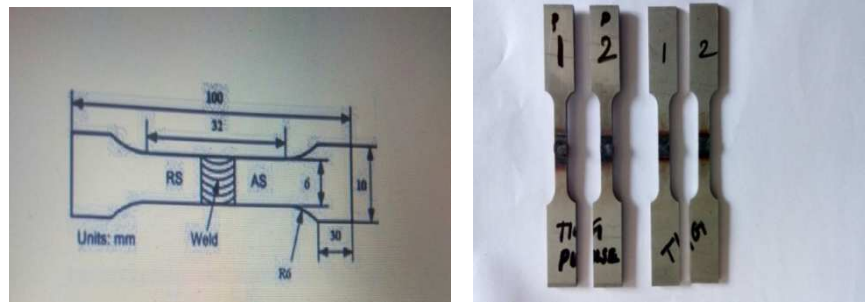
(a): Dimensions Of Flat Smooth Tensile Specimen Figure 6(b): AWS: B5 Tensile specimen
